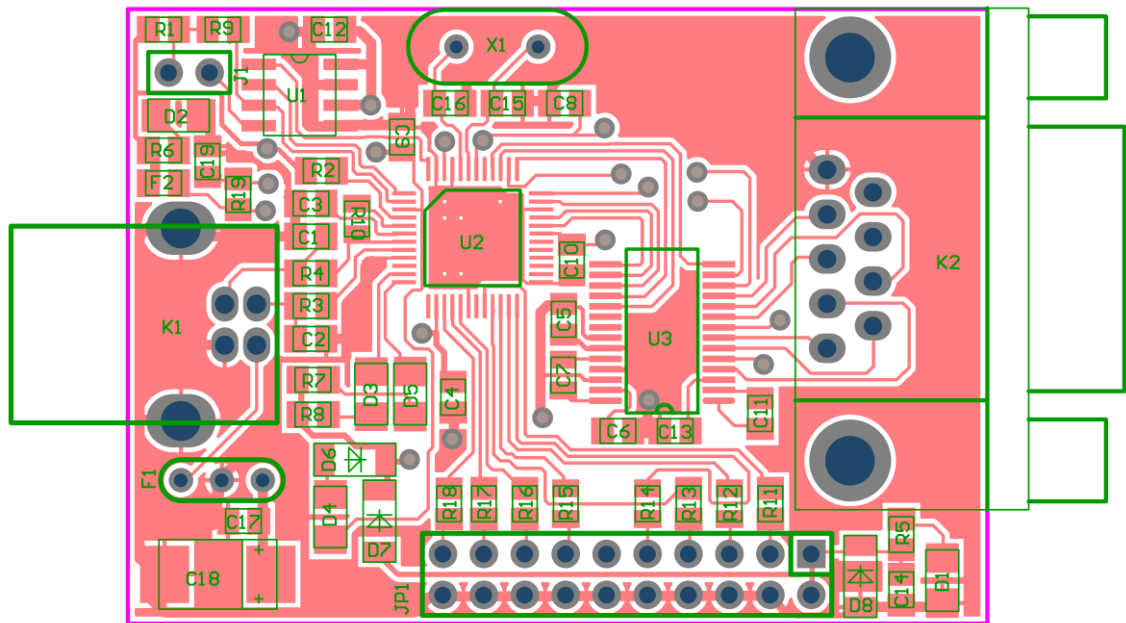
The assembly of the OpenOCD debugger – top layer
